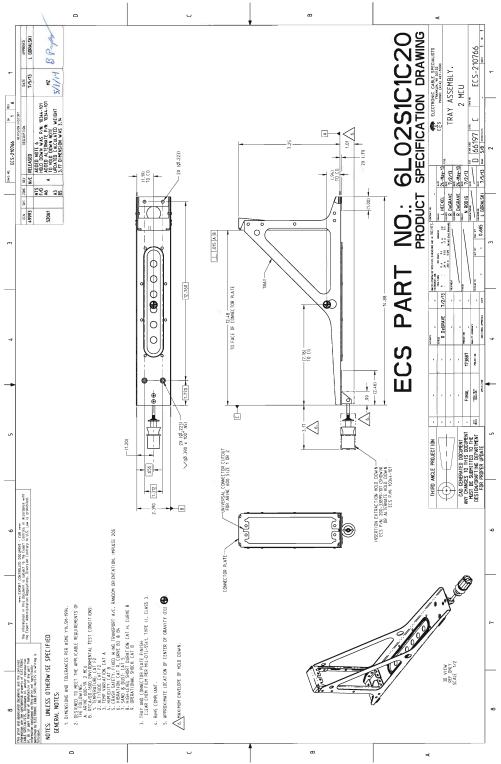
Outline drawing: CSDU/MCHPA tray
